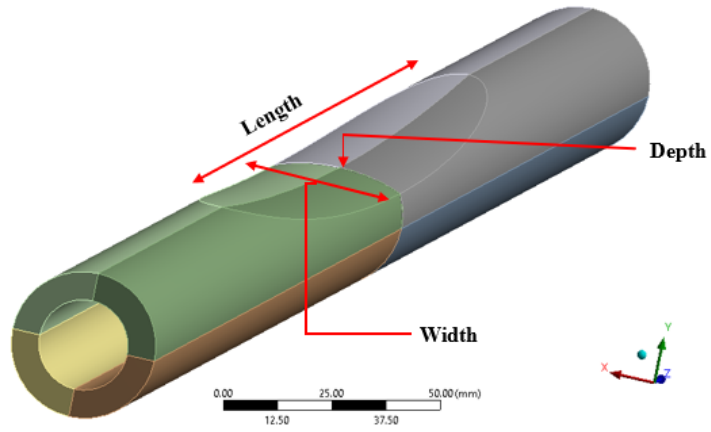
An n-shaped (saddle shaped) flawed tube.
